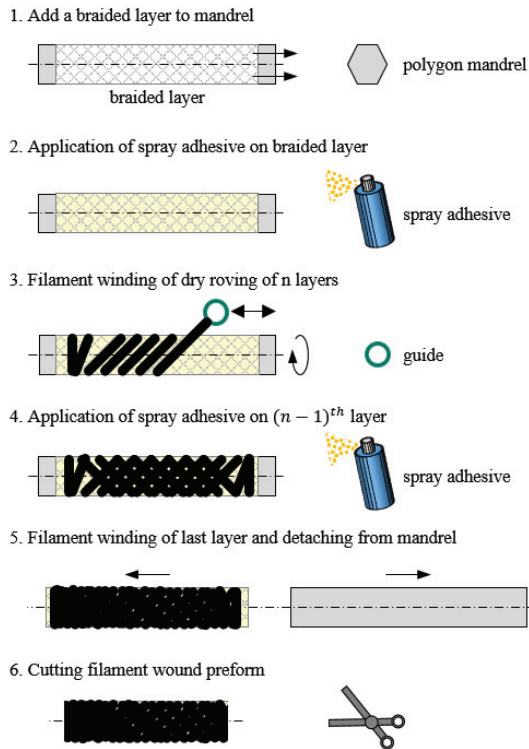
Process chain for manufacturing of CFRP metal hybrid rotor shafts by dry filament winding and centrifugal casting
